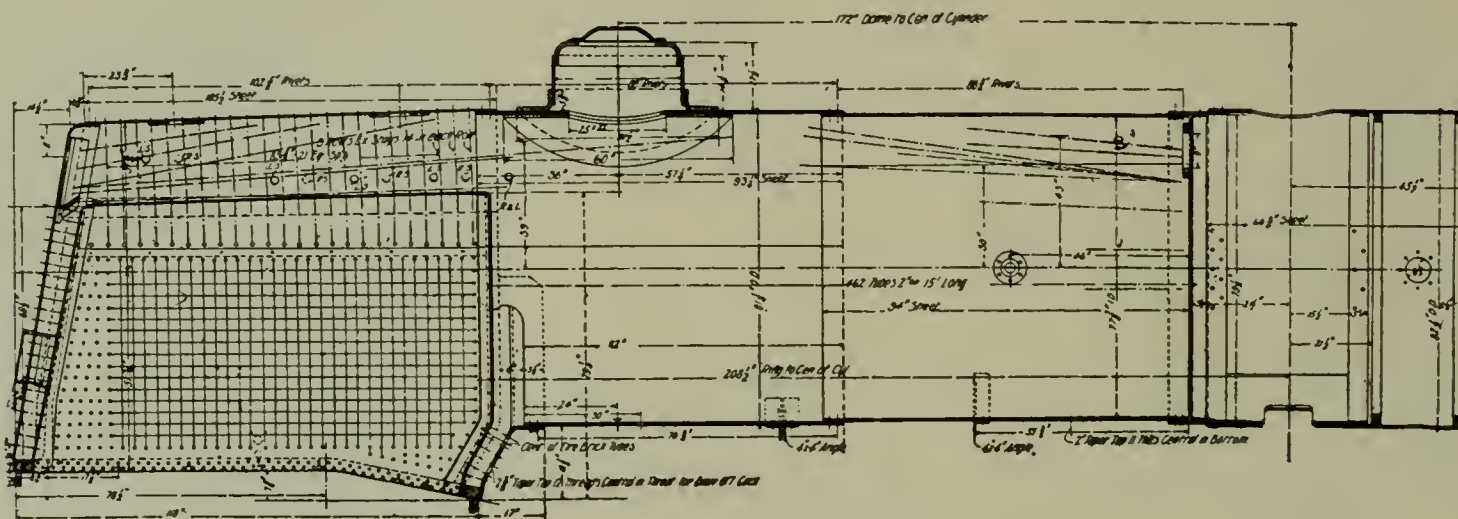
HEAVY FREIGHT LOCOMOTIVE, C., B. & Q. RY.—SIDE ELEVATION OF BOILER.
